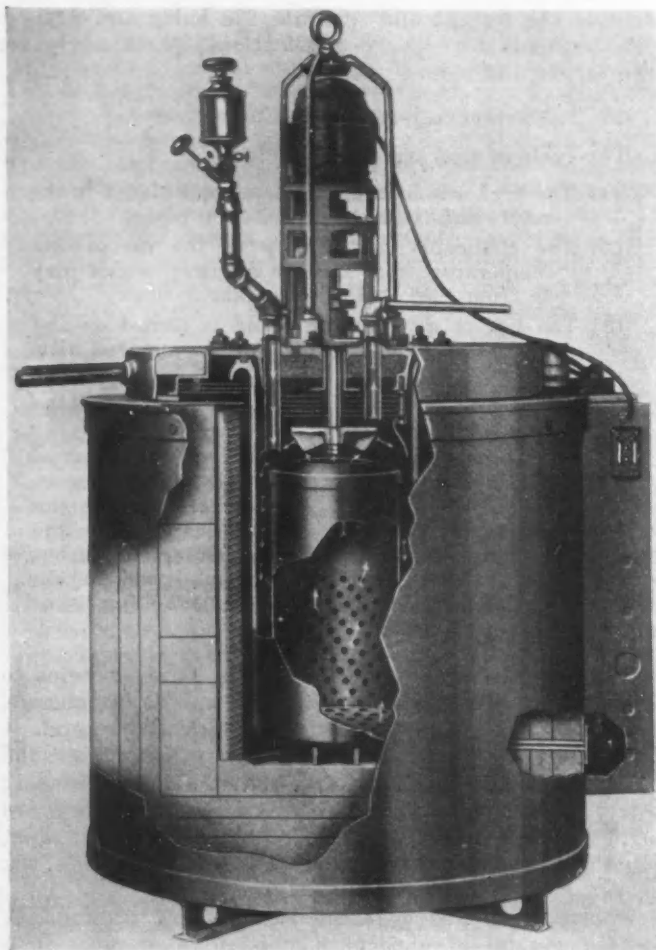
FURNACE ADAPTED FOR GAS CARBURIZING
